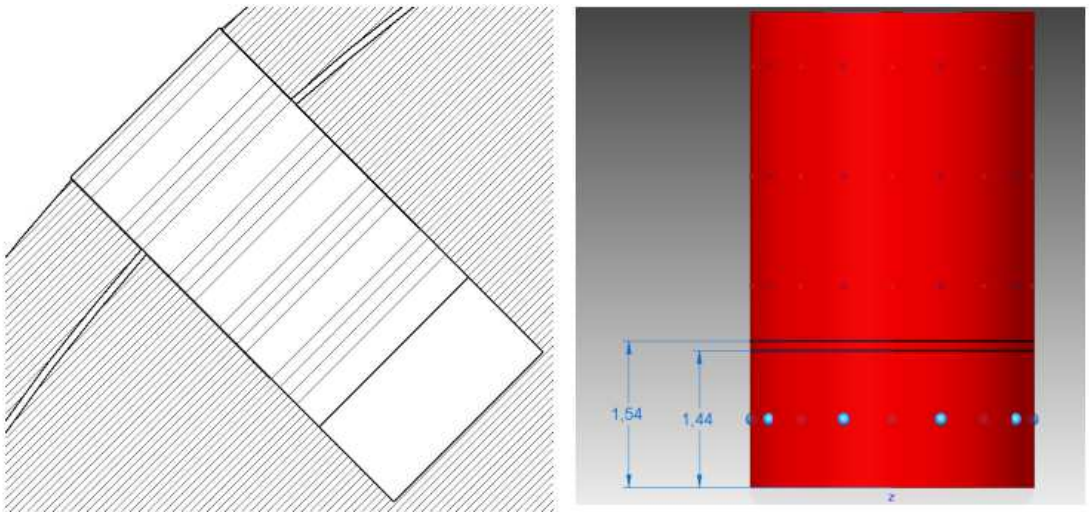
Shear pin fixture dimensions (right), cut throw section of the gripper assembly showing pin location(left).
